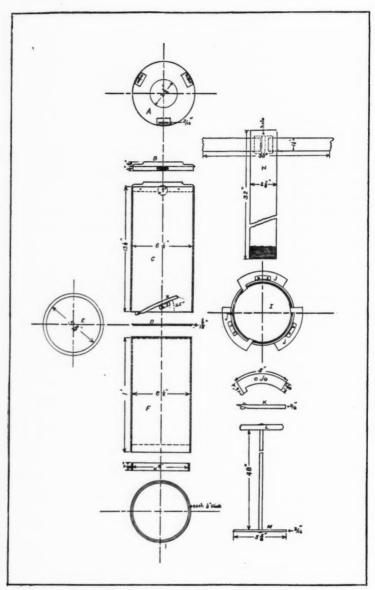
PLAN OF THE NEW SOIL CORE SAMPLER
